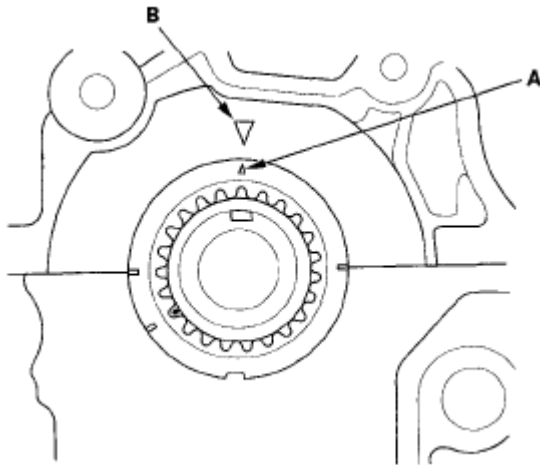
Aligning TDC Mark On Crankshaft Sprocket With Pointer On Engine Block
